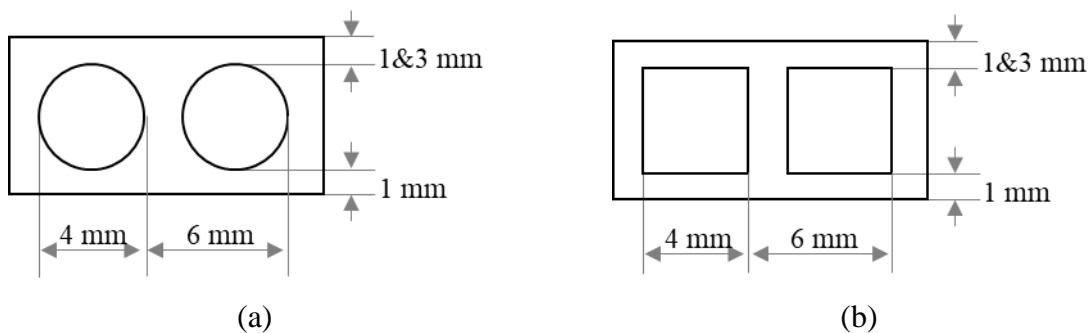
Schematic representation of the subsurface channels deployed into selective laser sintering of the DCB adhesive joints.
